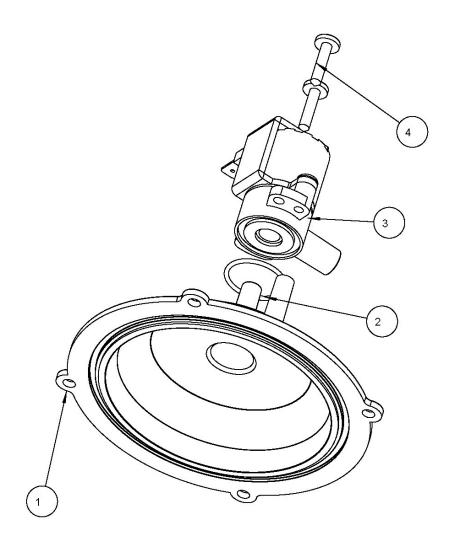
Brew Basket Assembly, 13" X 5", Part # 101266
